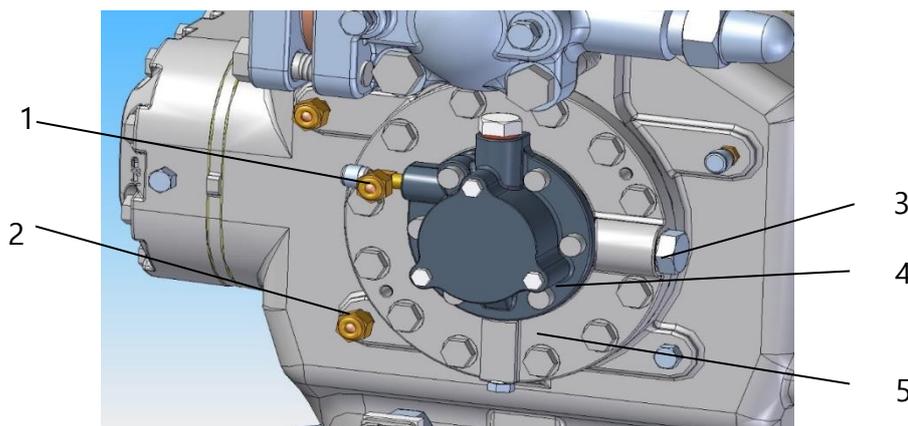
Gear pump for compressors PP4-L/Hxx PP6-L/Hxx PP8-L/Hxx
